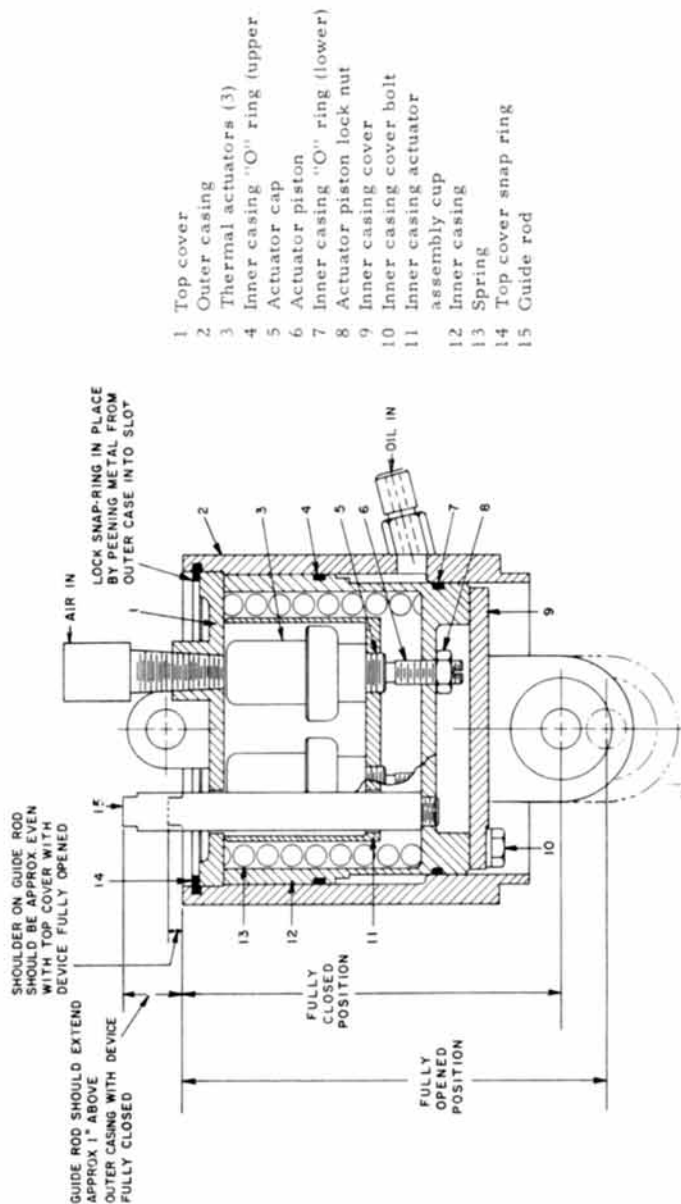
Cutaway view of overspeed and fuel-control device
